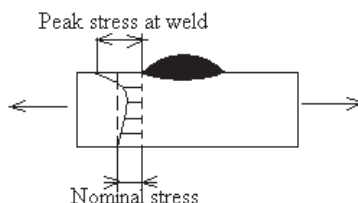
Stress concentration caused by the weld toe geometry.
